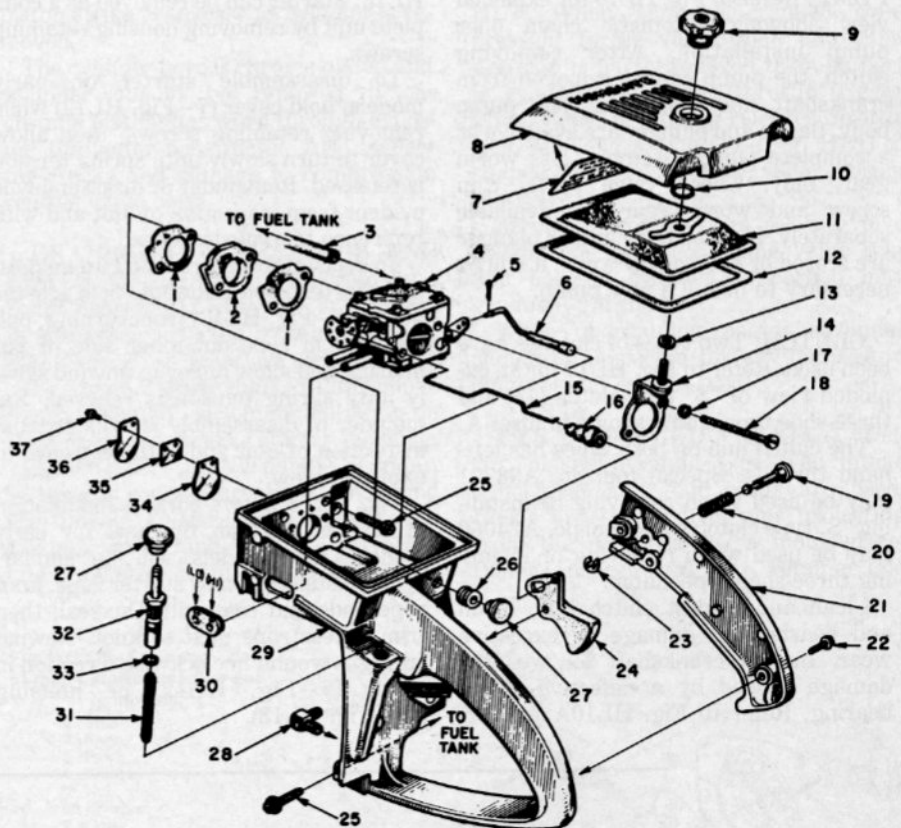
Exploded view of air box (throttle handle) and related parts on models with flat reed intake valve (34). Refer to Fig. HL31 for models equipped with pyramid reed valve.
